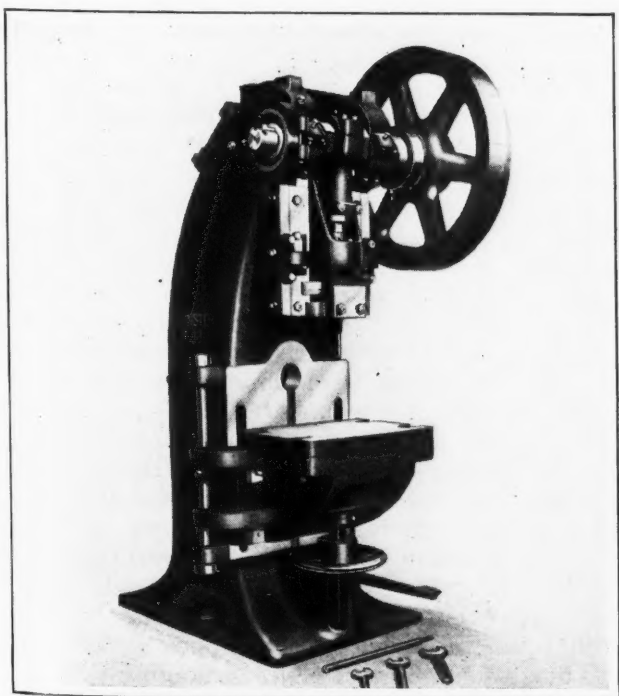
Minster Adjustable-bed Horning and Wiring Press
